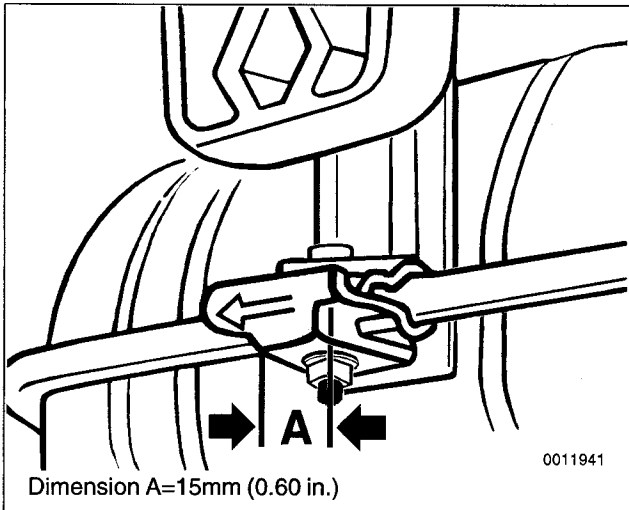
Preload rear clamping bracket as specified to help prevent system rattling.
